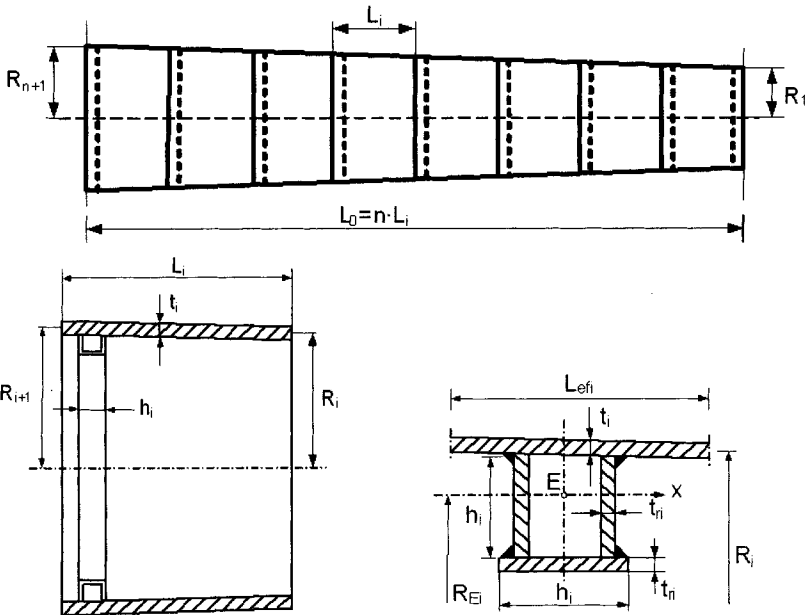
The main dimensions of the conical shell – a shell segment with the ring-stiffener of welded square box section
